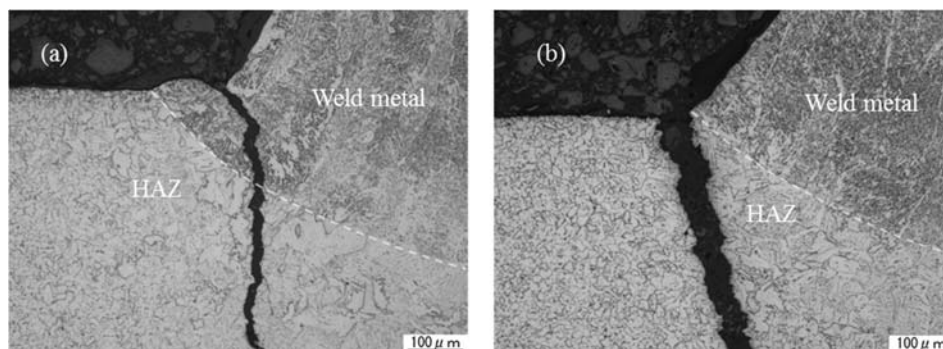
Cross-sections of 440FP as-welded joint specimens after fatigue testing. (a) Fatigue crack initiated from the weld metal, (b) fatigue crack initiated from the boundary of the weld metal and HAZ.
